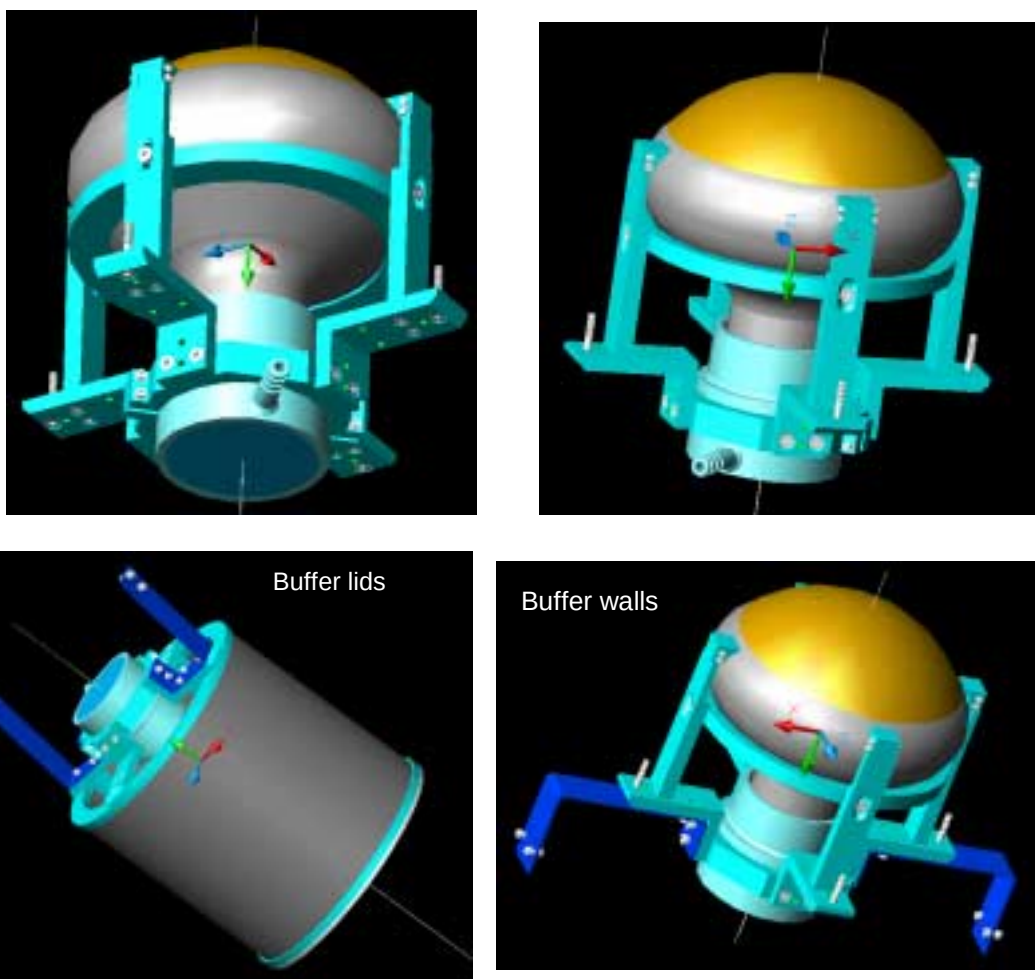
Fig.-18: Assembled mechanical support system including L and U pieces
